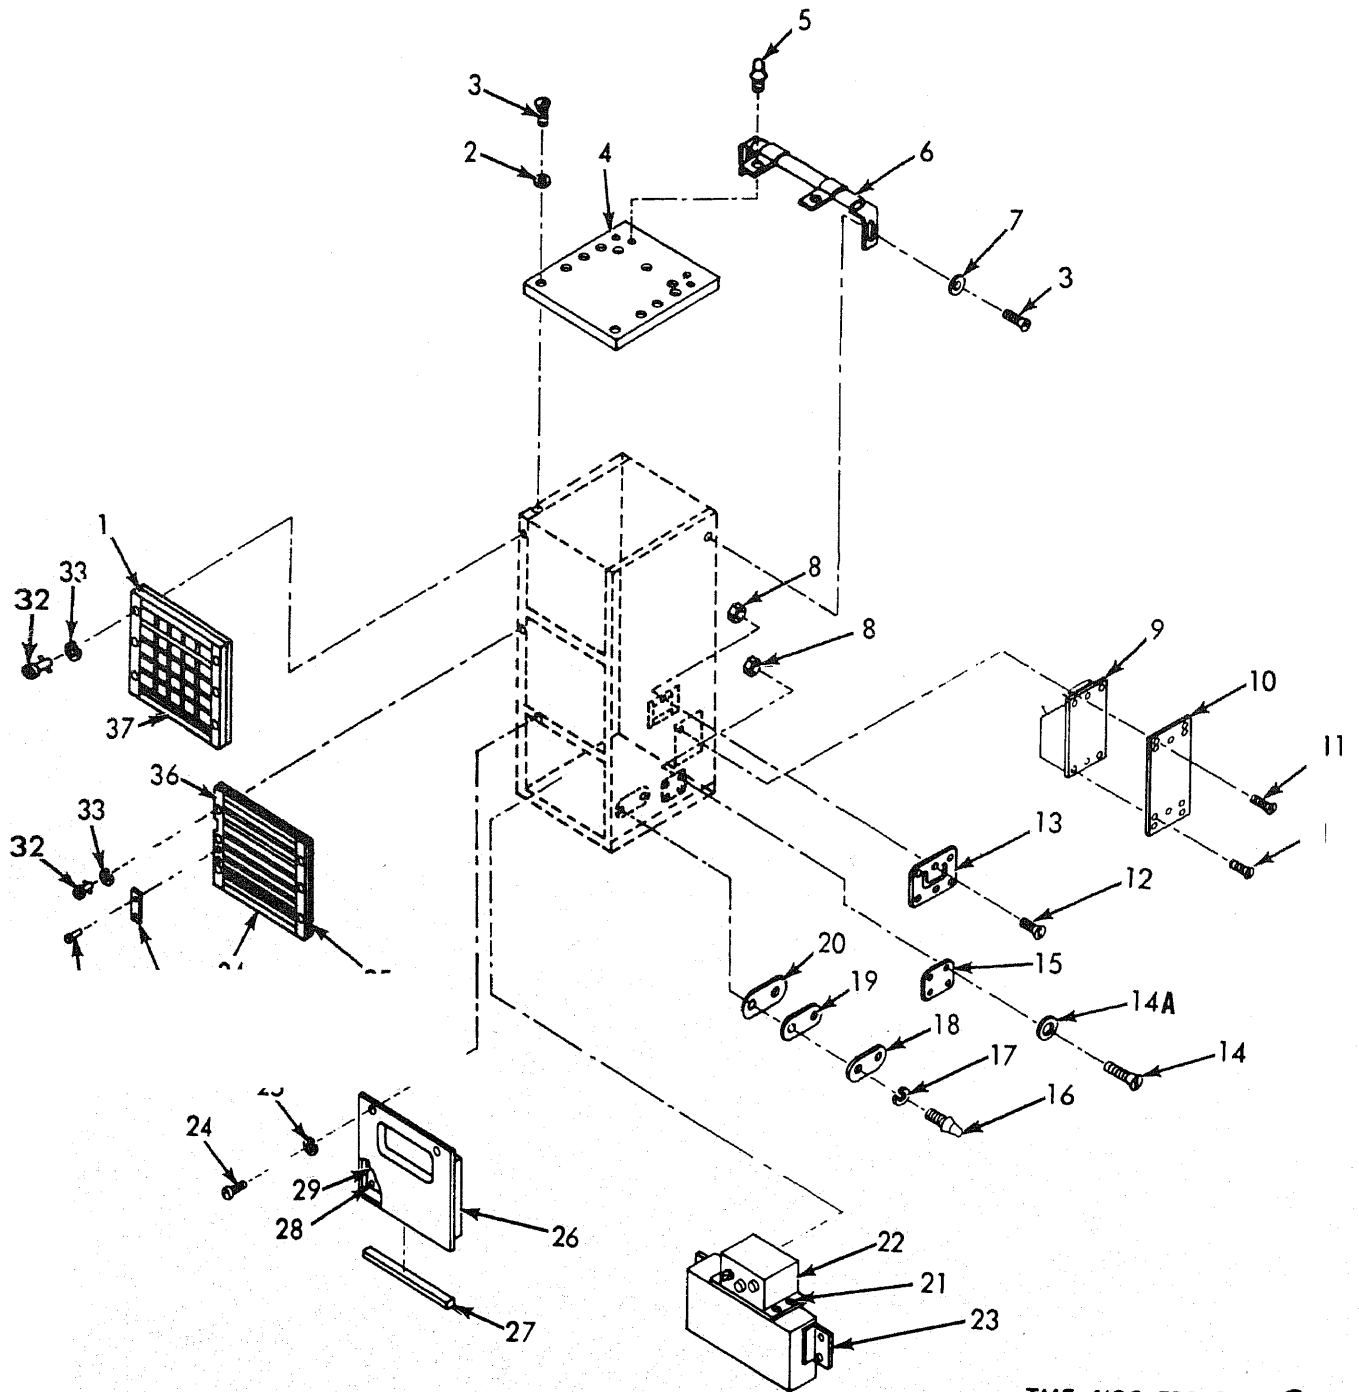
Body Chassis, Panels, Grilles, Screens, and Air Filter (Sheet 1 of 3).
